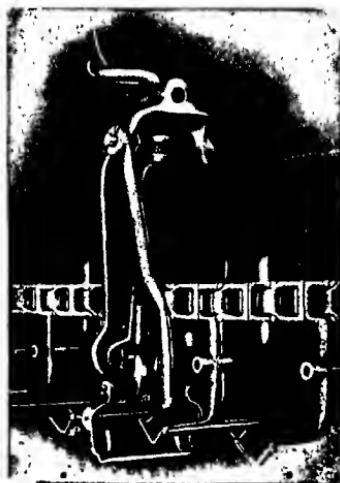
AUTOMATIC UNLOADING MECHANISM.
